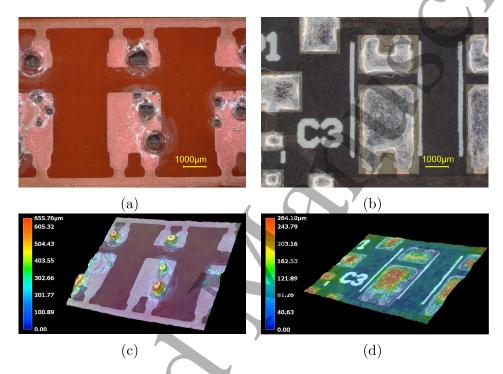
Solder wetting on different types of circuits. (a) Melted solder paste on a circuit printed with LF360 copper ink. (b) Melted solder paste on a commercial circuit made from copper laminate. (c) 3D topographic representation of the melted solder on the copper print seen in (a). (d) 3D topographic representation of the circuit seen in (b).
